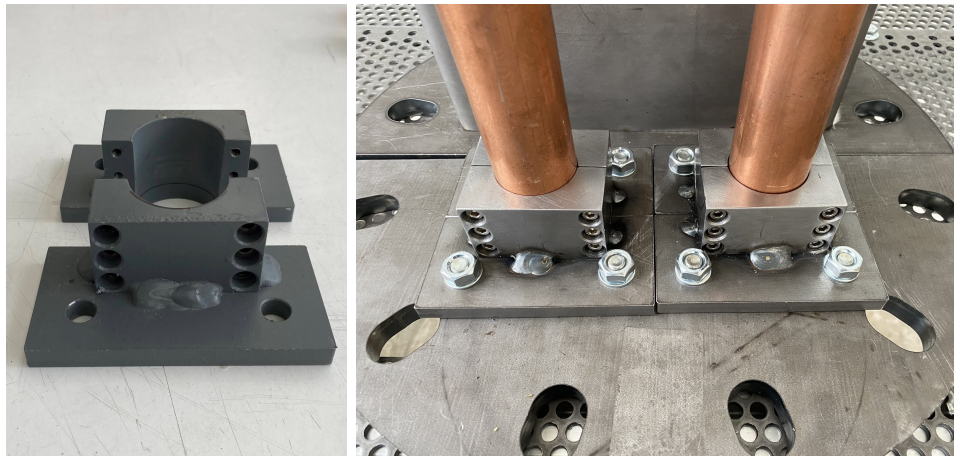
Detail of the steel piece responsible for holding the prototype, and detail of its assembly with the support and the hot side two phase loop thermosyphons.
